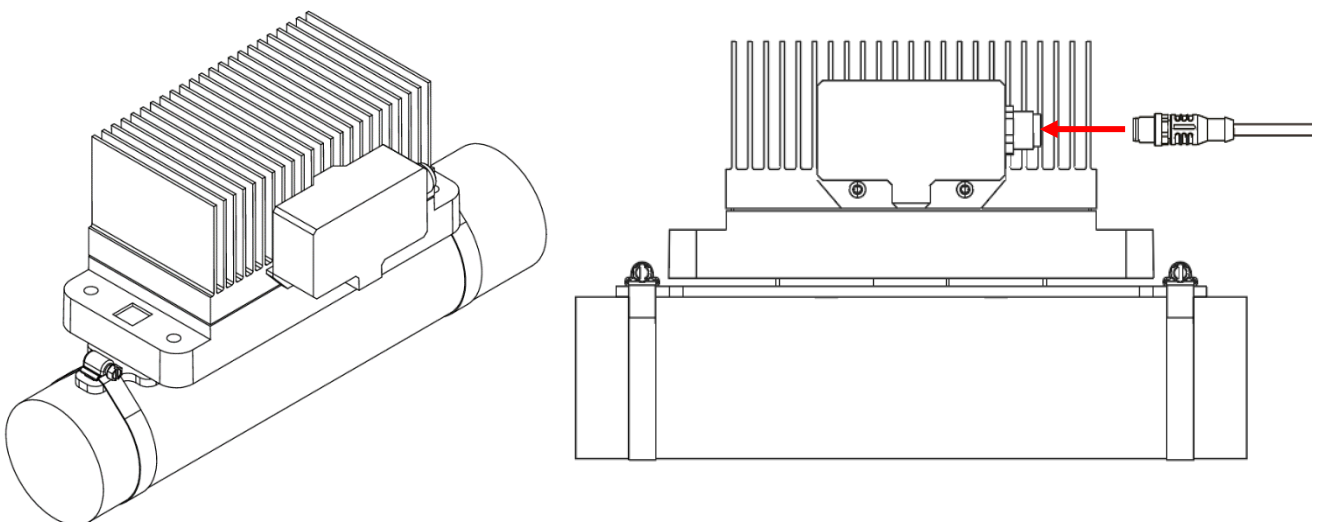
Power supply (InduEye® TG Duo module– Tube mounting) connection
